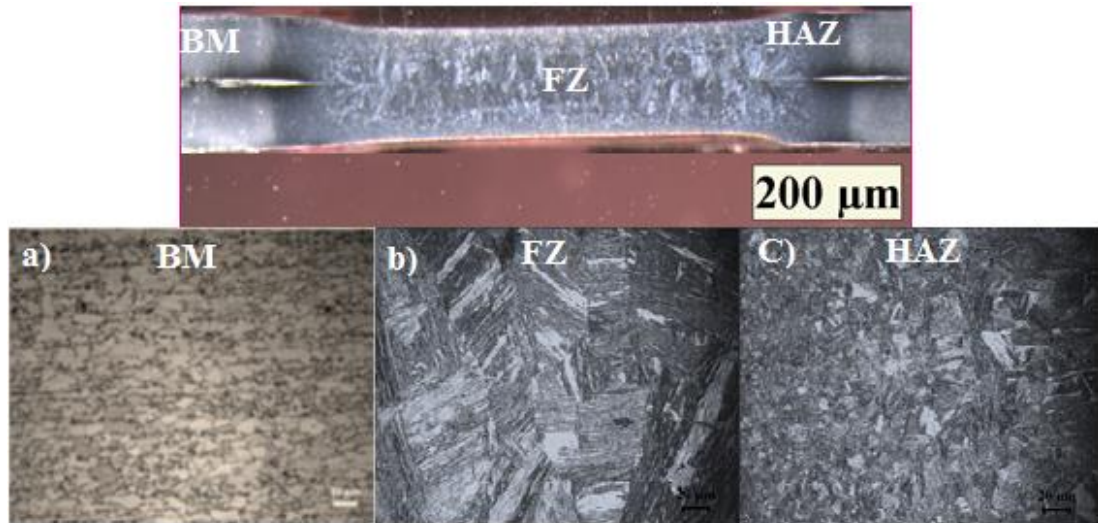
The microstructure of weldment joined with 3.5 Bar electrode force with 6kA welding current. a) DP600 base metal (BM), b) DP600 Heat Affect Zone (HAZ), c) DP600 weld nugget (FZ). parameters of (3.5 Bar – 6 kA).
